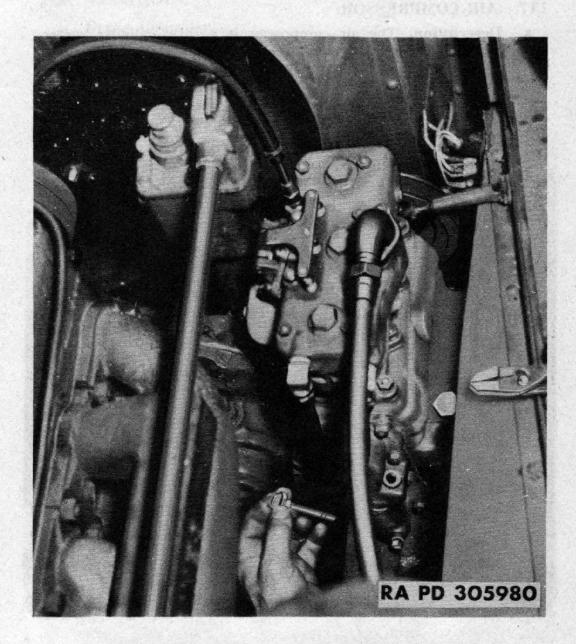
Auxiliary Air Compressor Installed (Bridge Erection Truck Only)
